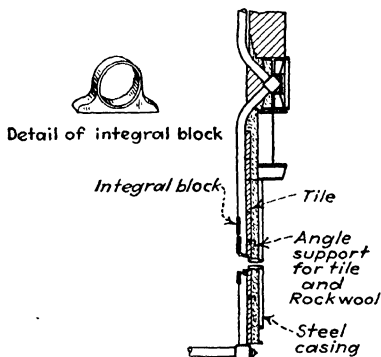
Waterwall protected with integral cast-iron block fused to the tubes and backed with rockwool insulation and steel casing. (*Combustion Engineering Company.*)
